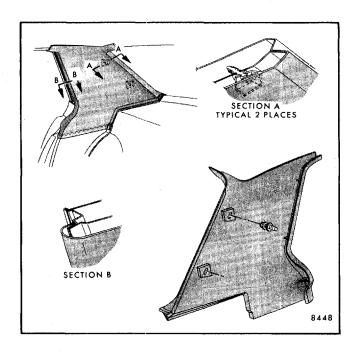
Quarter Upper Trim Attachment - X-69 Styles
